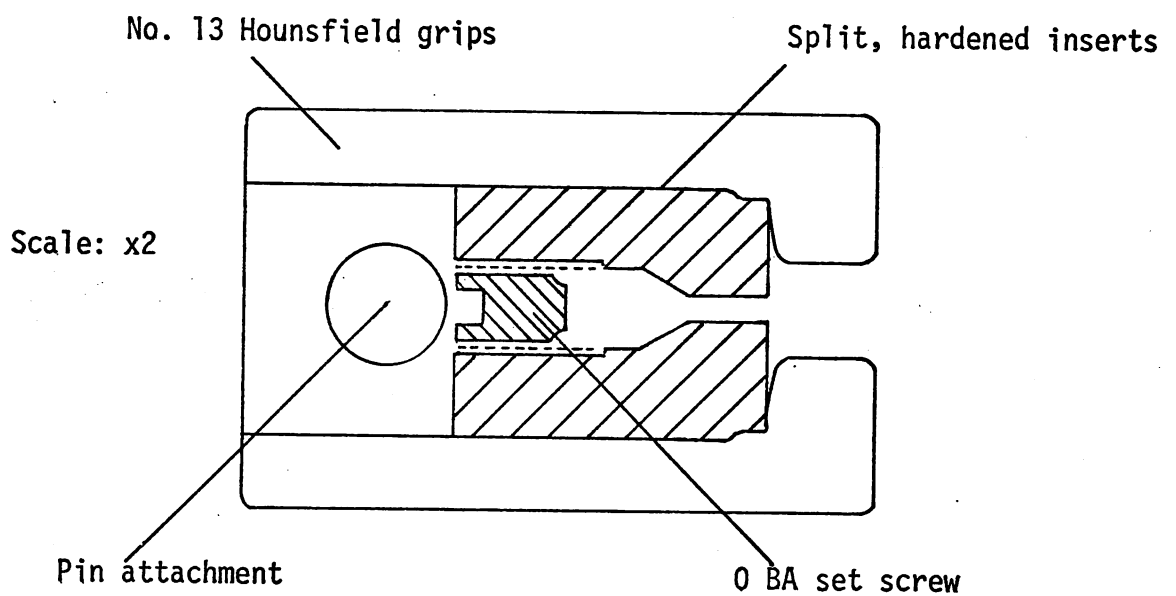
Design of the inner wire grips (NSOH steel inserts).
